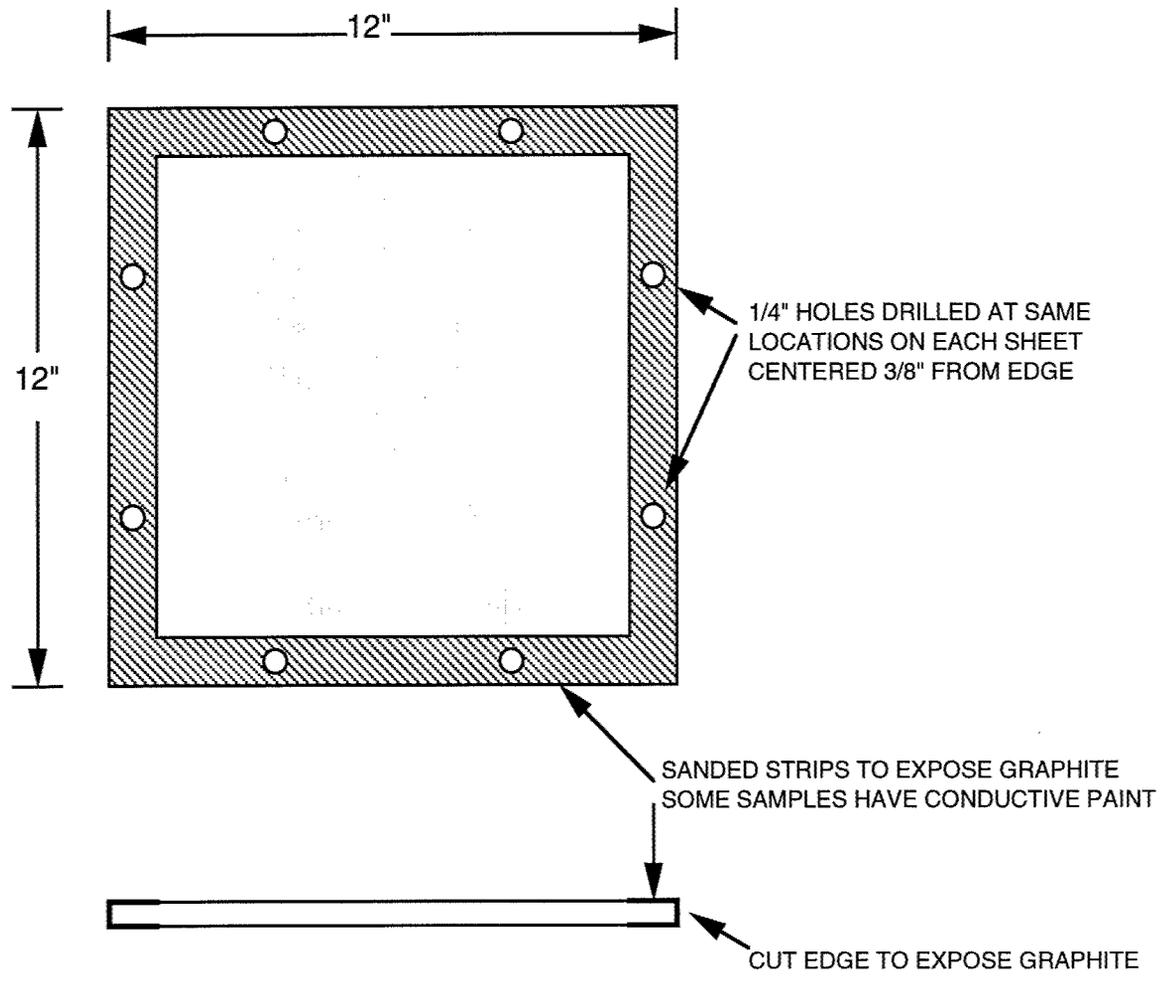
TEST SAMPLE CONFIGURATION
